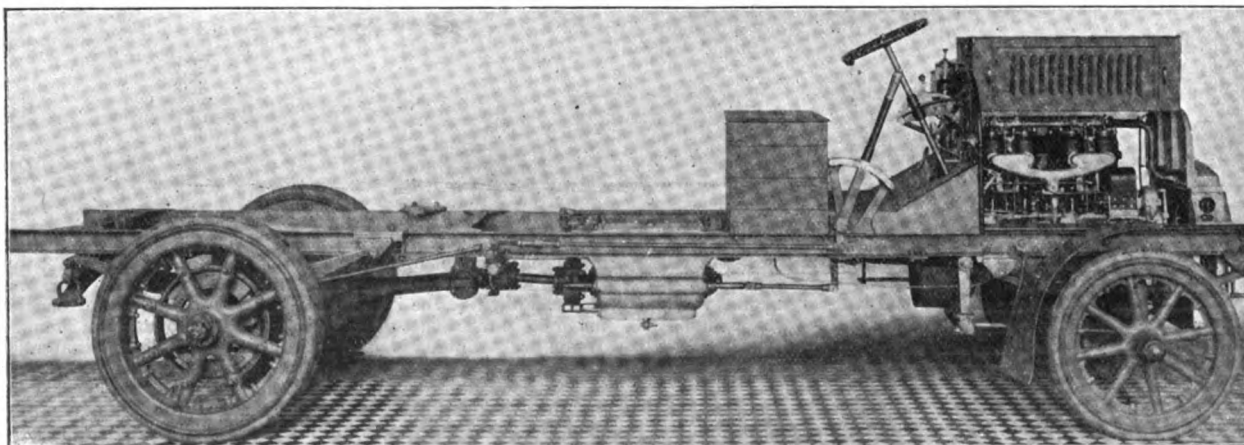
Side View of Chassis of Leyland Motor 'Bus.
